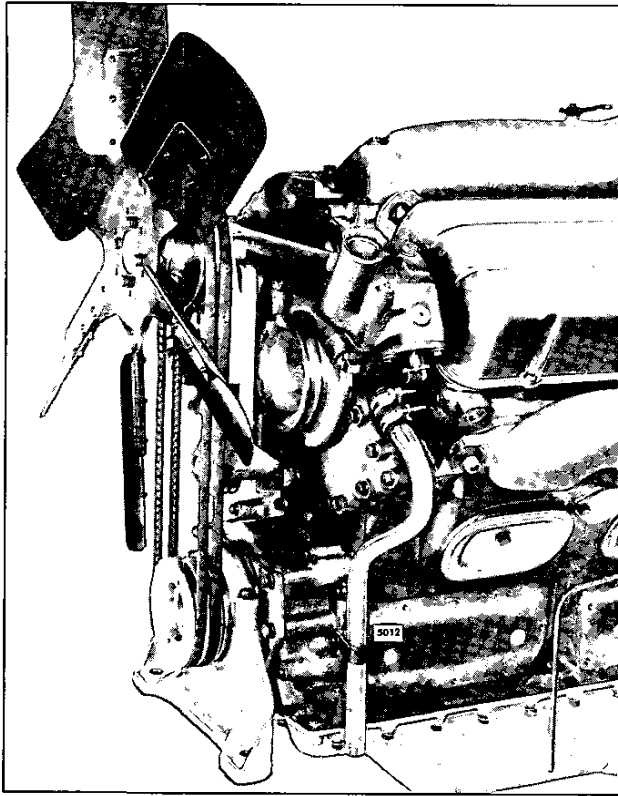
Belt-Driven Fan Mounting (V-Type Engine)
